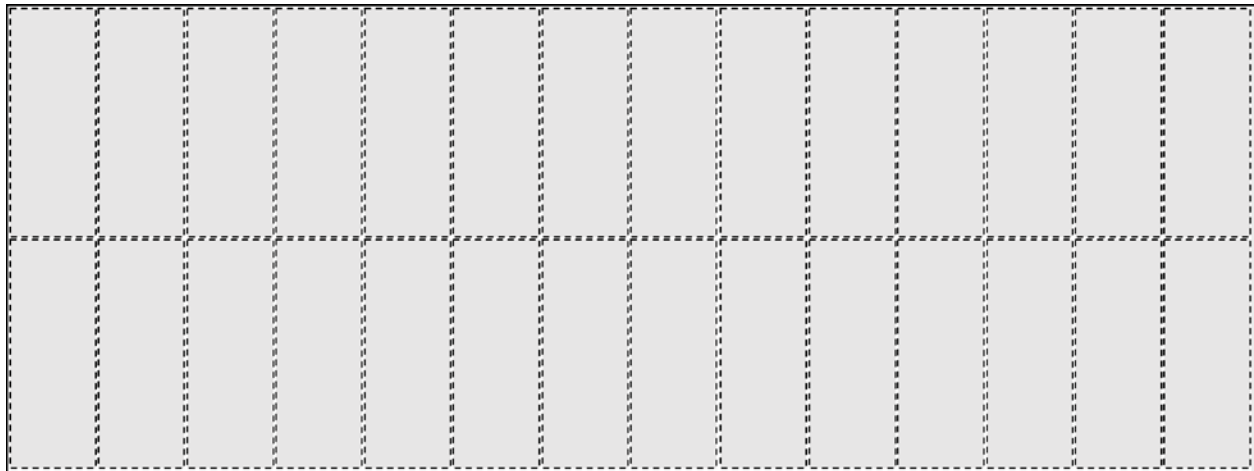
Mock layout of raw stainless steel sheet with cuts for covers marked
